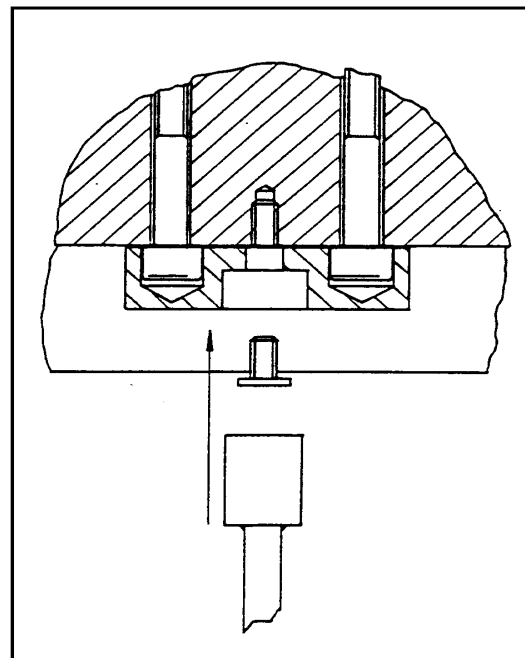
Attach fixings security cover using M6 x 12 (ref SFC 25) security screw and special tool provided.
